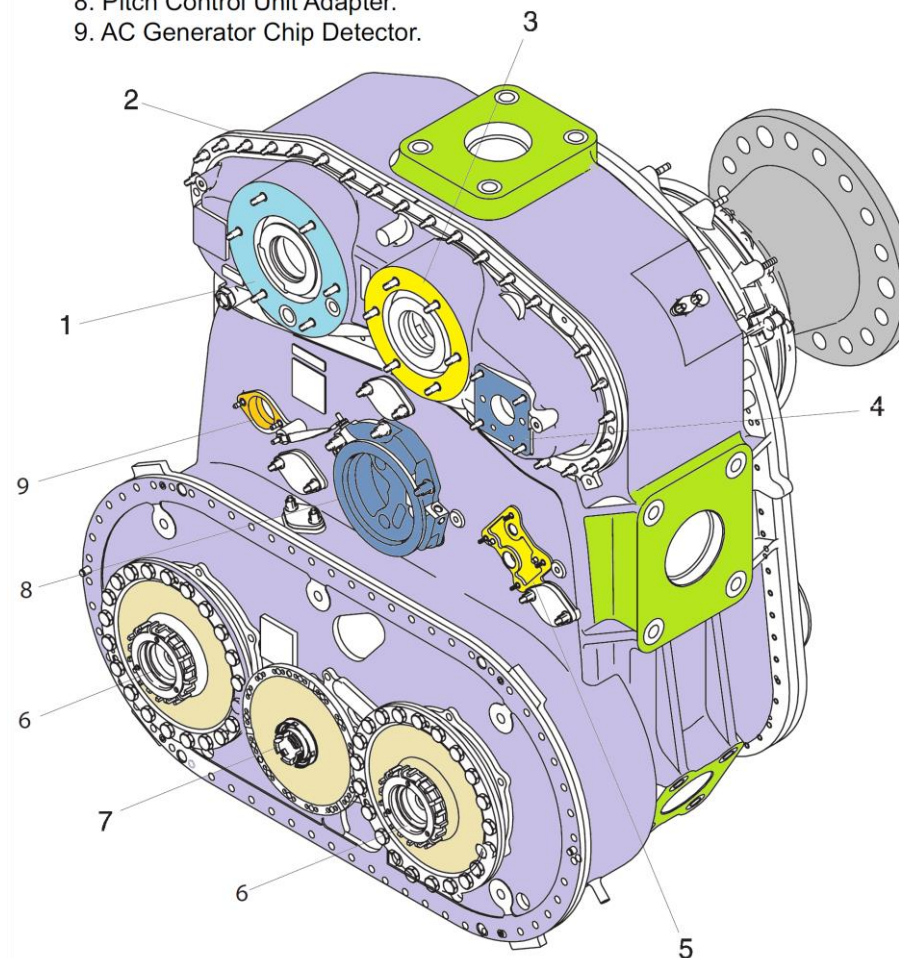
Reduction Gear Box (RGB) - Rear Detail
